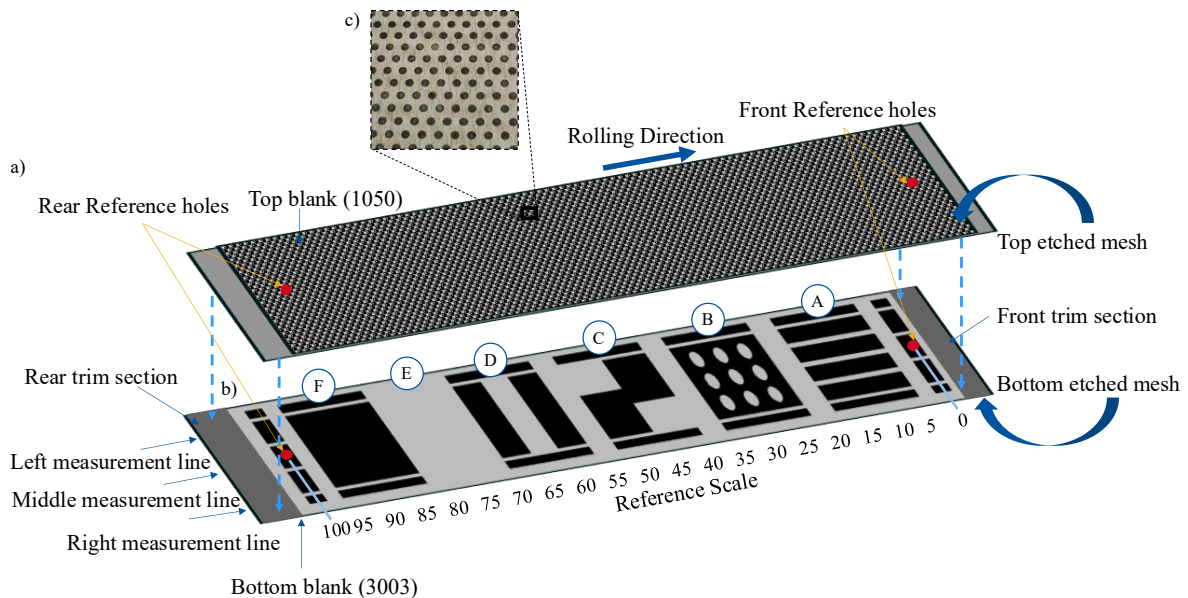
a) Blank package before rolling with b) separating agent pattern (black) on bottom blank and c) etched mesh on outer surfaces.
